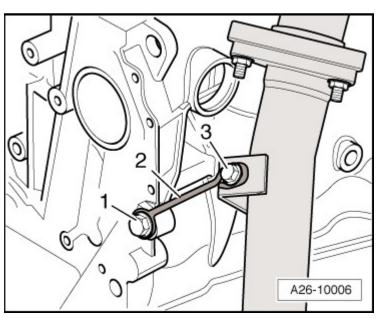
Front Exhaust Pipe Support & Bolts Courtesy of AUDI OF AMERICA, LLC
